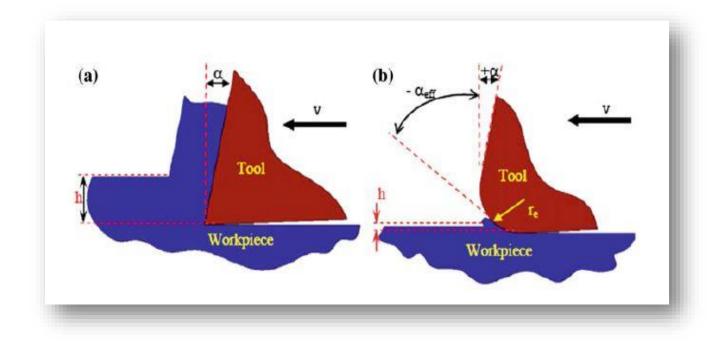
Relation of depth of cut and Chip thickness (a) Macro milling, (b) Micro milling
